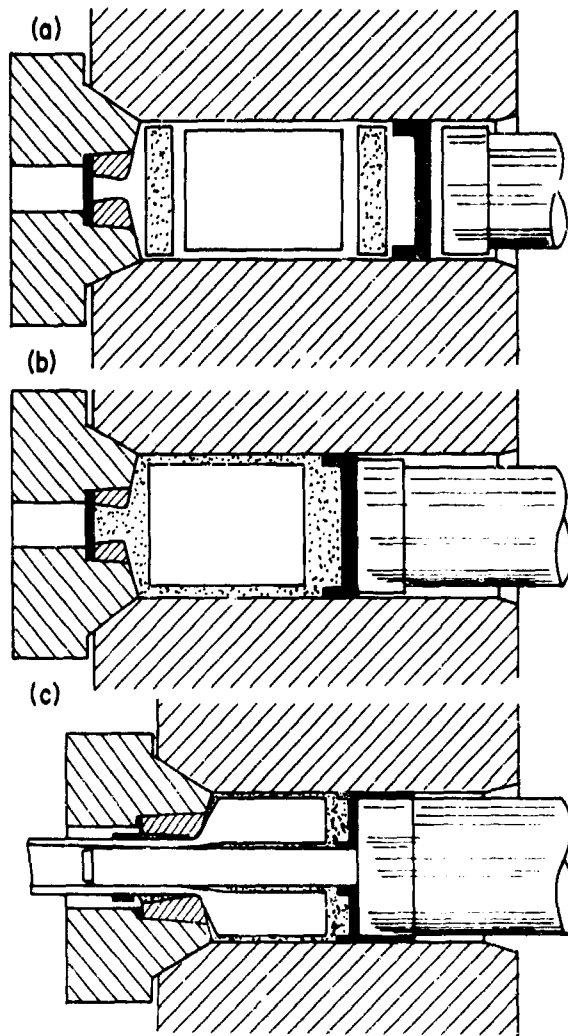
The C. E. A. process for extrusion. (a) Lubricant, billet, and rear seal in position; (b) fitting the pressure pad; (c) extrusion of a tube in progress [3].
